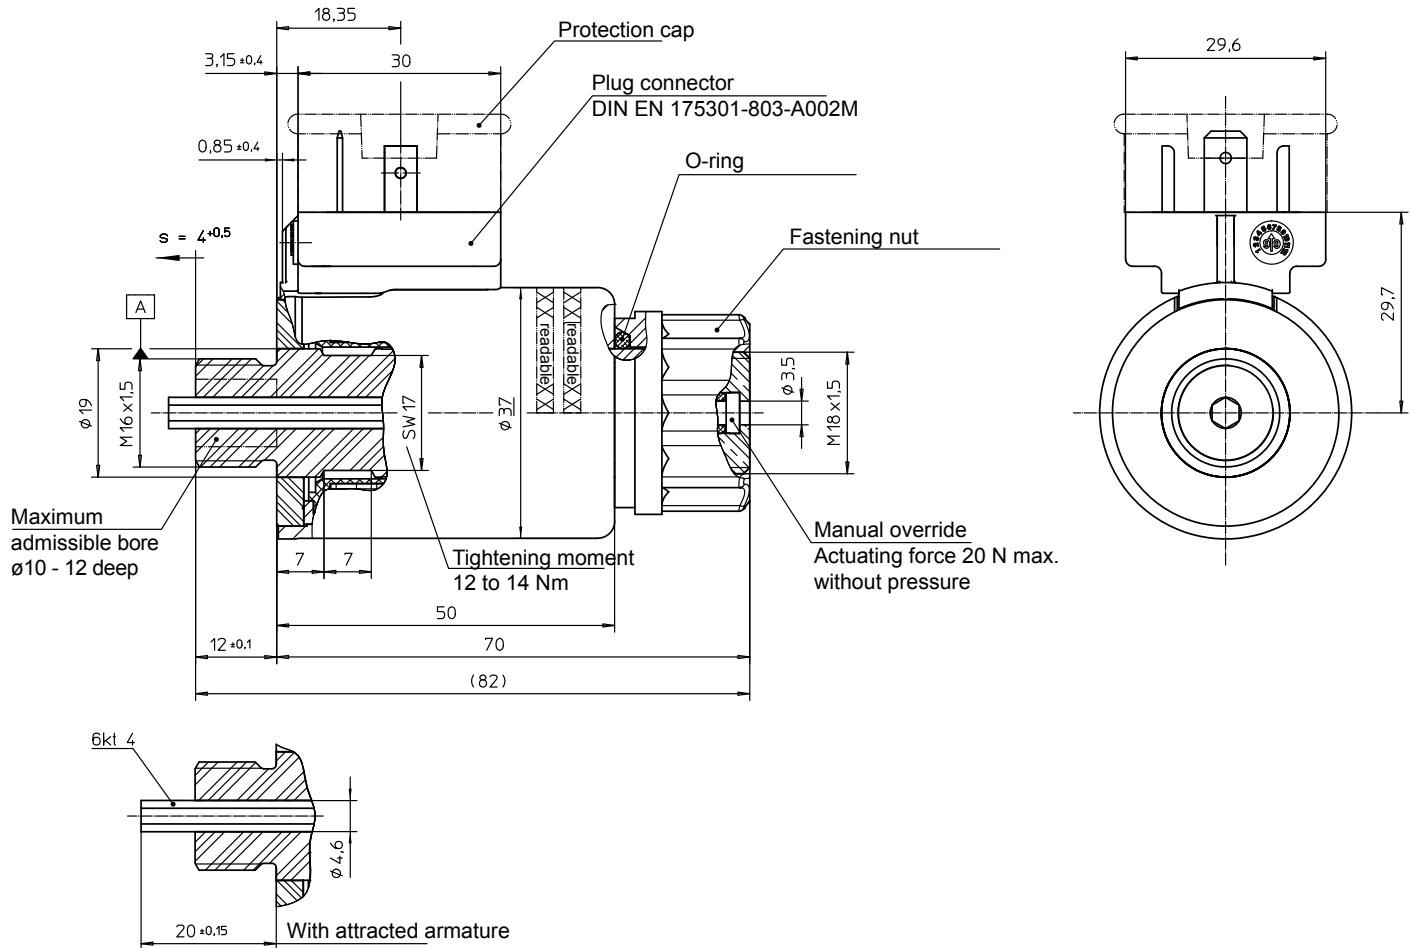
Dimensional drawing to Type G HP Y 037 N54 A01
